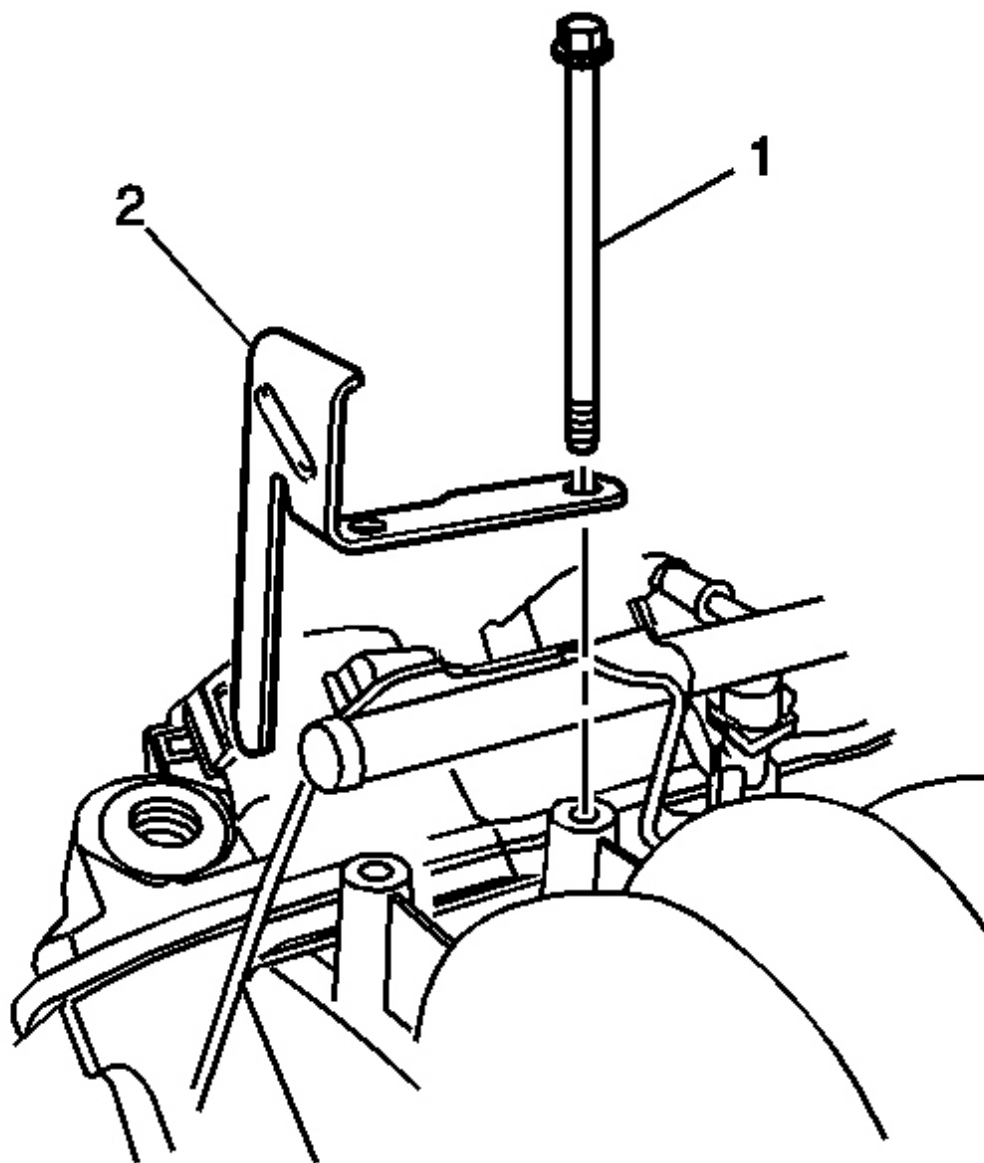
Intake Manifold Bolts & Fuel Rail Stop Bracket
